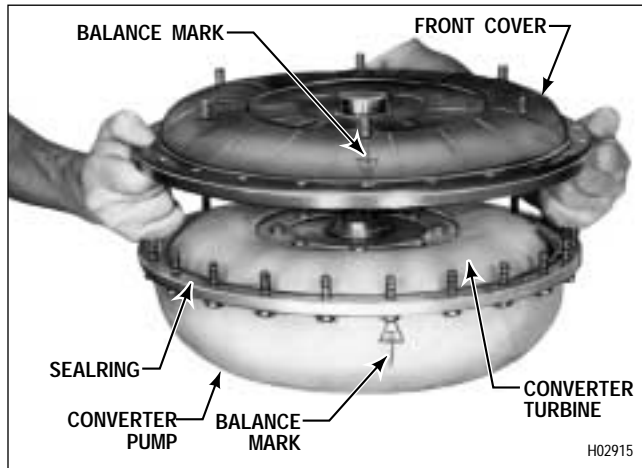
Removing (or Installing) Torque Converter Cover (AT 543)
